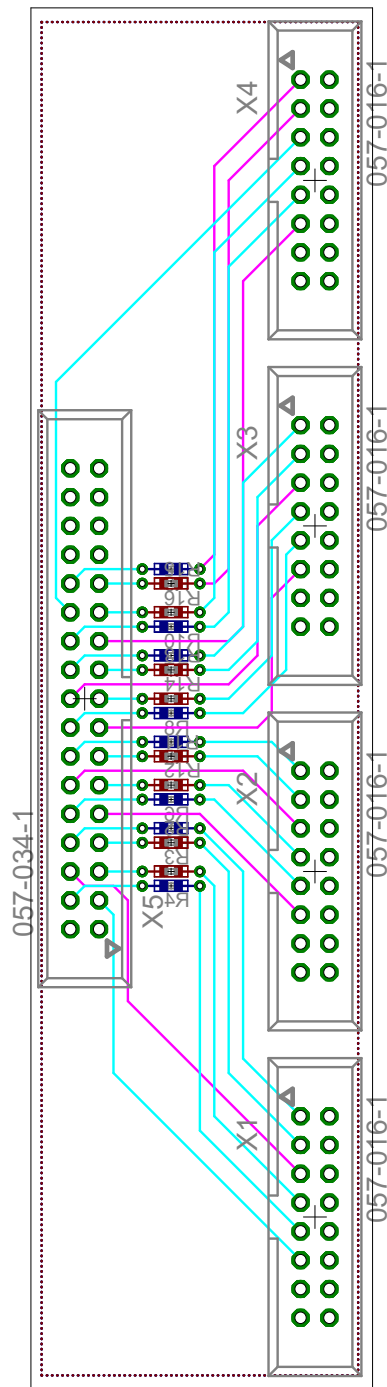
Adapter Board–The ribbon cable that brought bias from the chamber feed-through to the adapter board.
